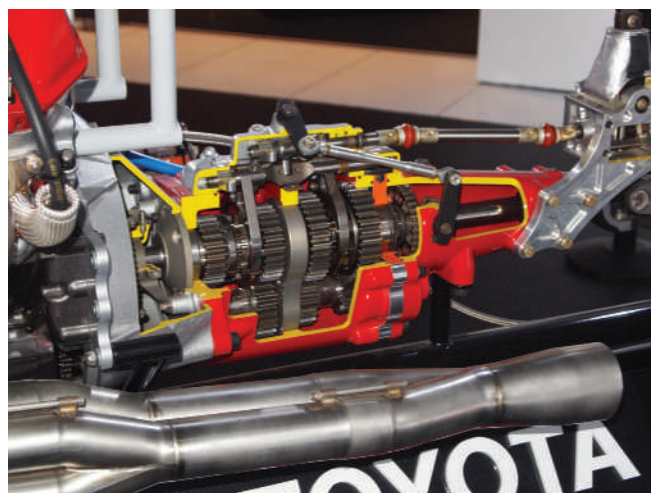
Spur gears have teeth cut straight across the gear edge parallel to the shaft.
